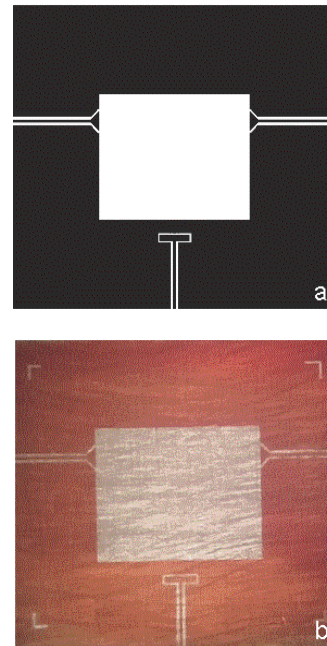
Package base: a) mask for photolithography; b) Actual fabricated PCB board fabrication.
